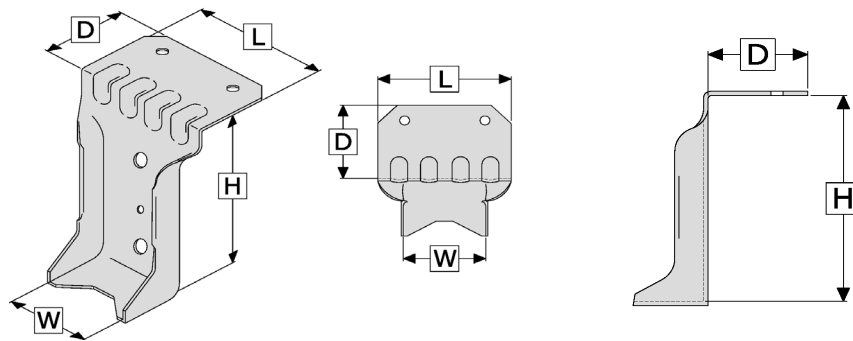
TYPICAL TF PANELIZED ROOF HANGER
